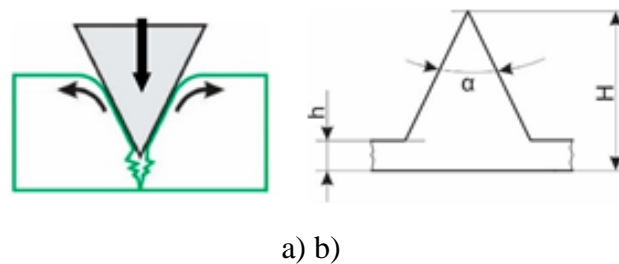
The die-cutting knives: a) die-cutting process; b) geometry of the die-cutting knives:
